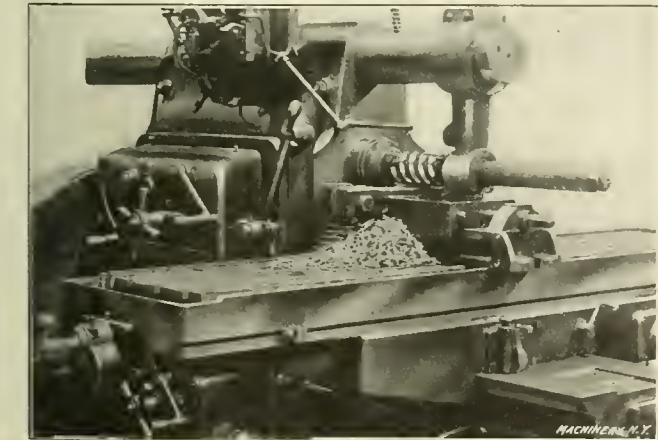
Helical Cutter at Work on Steel Test Pieces
